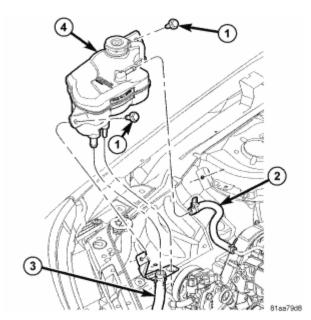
View Of Coolant Recovery Container - Pressure System Courtesy of CHRYSLER LLC
